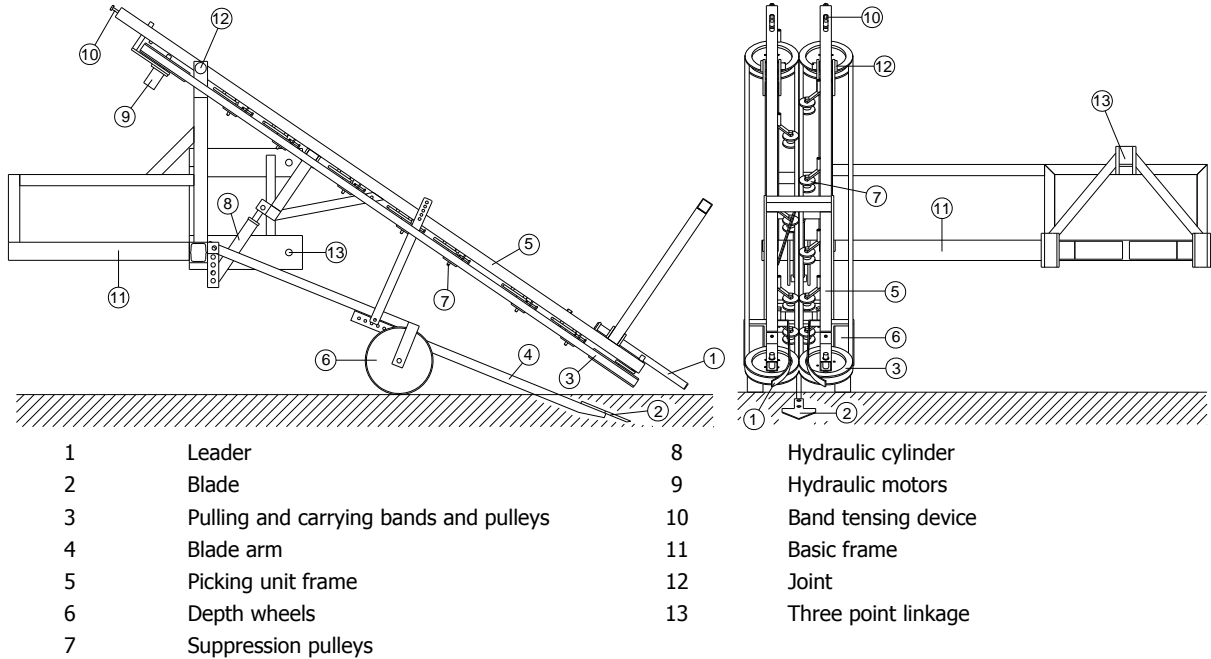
Left side and front views of the prototype leek pulling machine (In working conditions).
